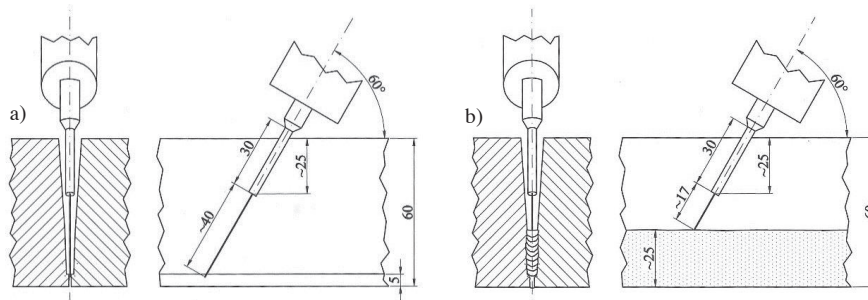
a) Configuration for laser welding with cold filler wire in filling of lower 25mm portion. b) Configuration for laser-arc hybrid welding of upper 35 mm portion.
